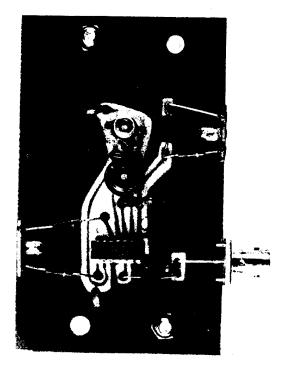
Top view of wired test board (for 14-lead dual-in-line plastic package)
